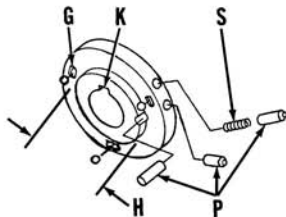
Inspect driving plate ball grooves (G), detent pins (P) and their bores, and keyway (K) for any noticeable wear. Driving plate hub outside diameter (H) should not be less than 58.8 mm. Detent pin spring (S) free length should be 32.0-32.85 mm.
